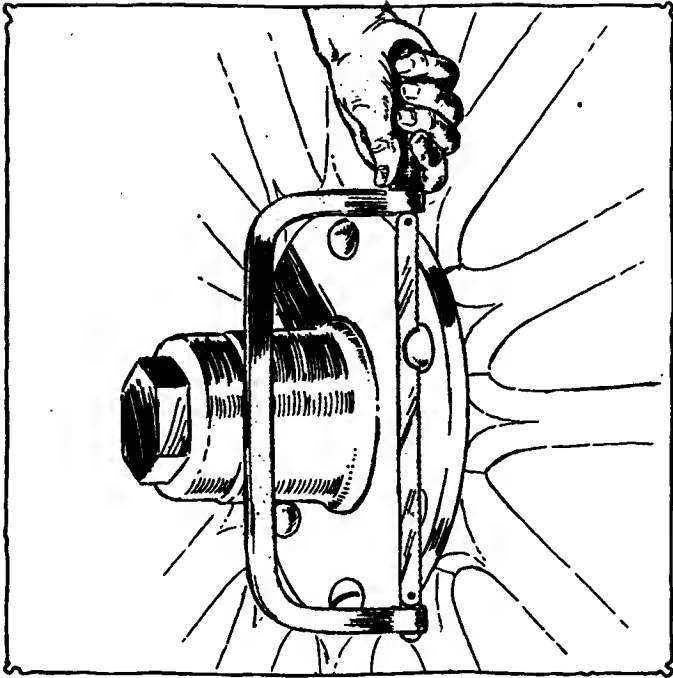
Slot the heads of the round-headed bolts to make space for screwdriver
